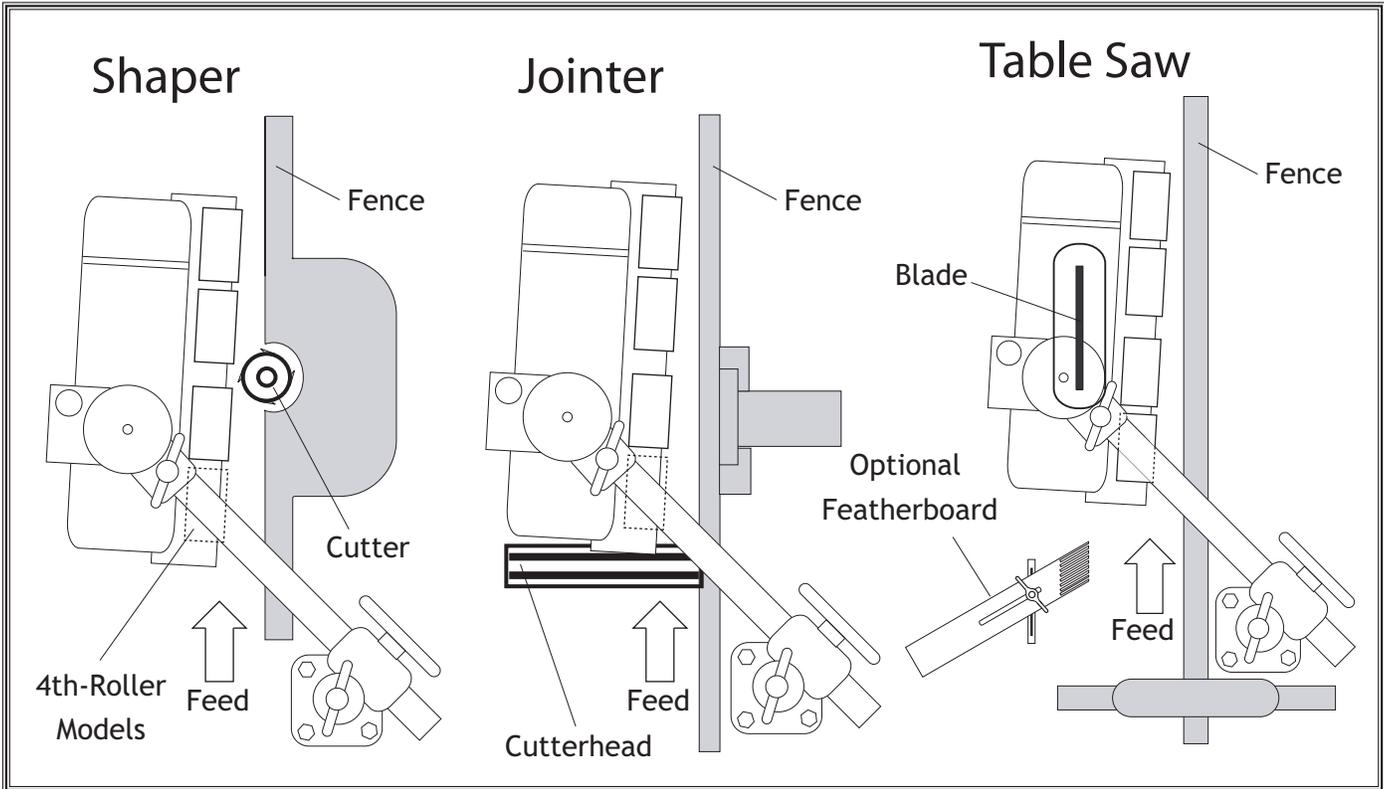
Typical power feed mounting on a shaper, jointer, and table saw.
